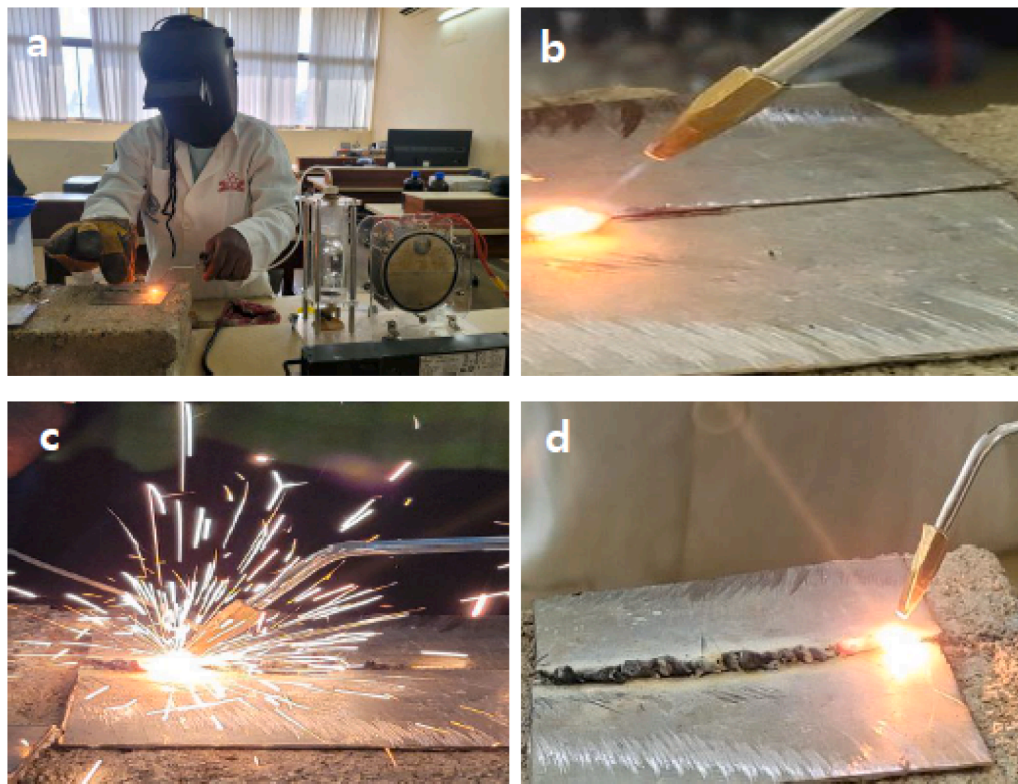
Images of (a) welding with HHO gas, (b) joining the test piece with a weldable flame, (c) spark flame with the introduction of filler metal, and (d) appearance of beads on the test piece during welding with HHO gas.
